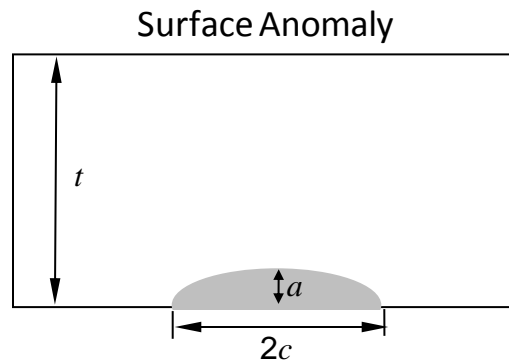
Dimension of girth weld planar anomaly
